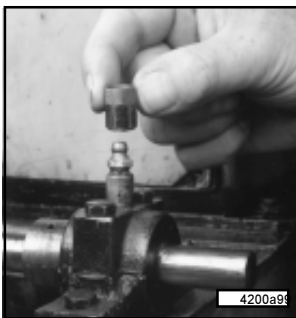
Place the Zerk-Lock body over the grease fitting
